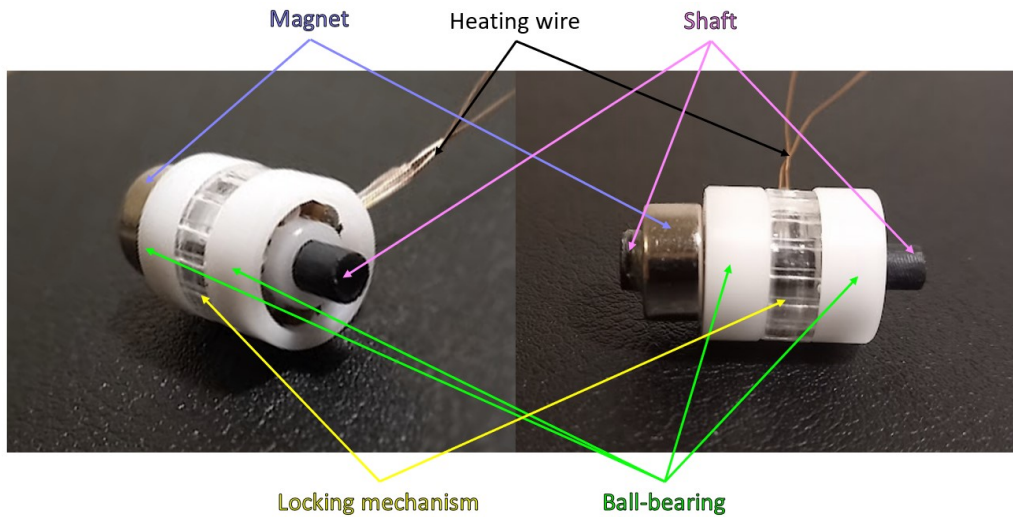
Final design with magnet, two ball-bearings, shaft, locking mechanism and beam connected to the shaft inside the locking mechanism with heating wires.
